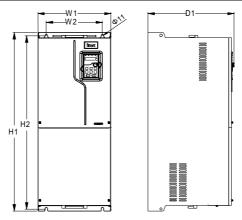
Wall-mounting drawing for the 380V 0160-0185 models
